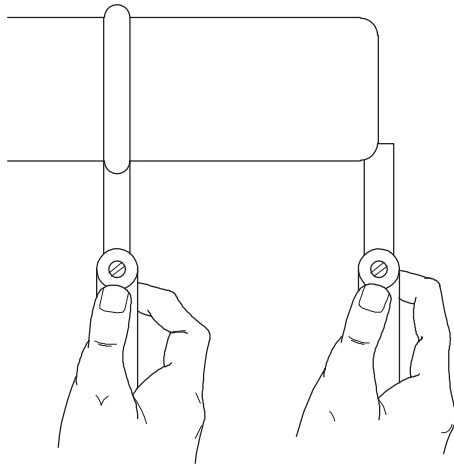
shows the application of radius gauge to check the radius formed externally. Fig 17 shows the application of a fillet gauge to check the fillet formed on a turned component. The other typical applications are:
